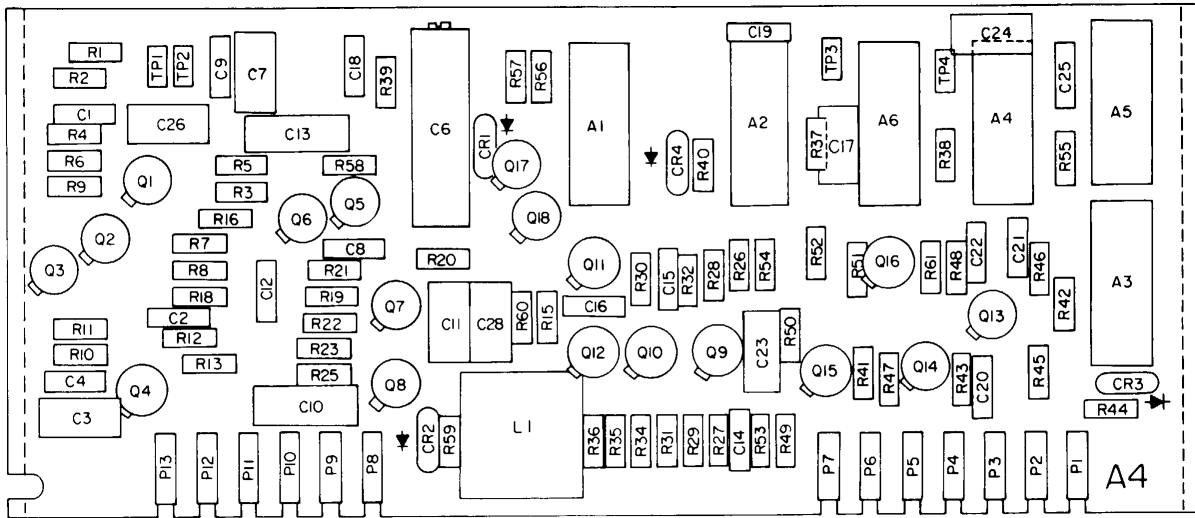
Comparator-Decoder Assembly (01A233758-22-11) (A4), Component Locations (Sheet 2 of 2)
